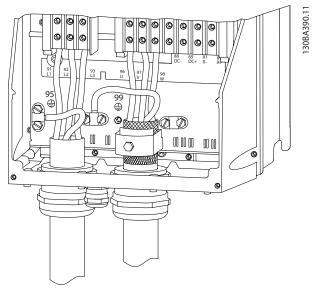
Motor, Mains and Earth Wiring for B-, C- and D-Frame Sizes Using Shielded Cable
